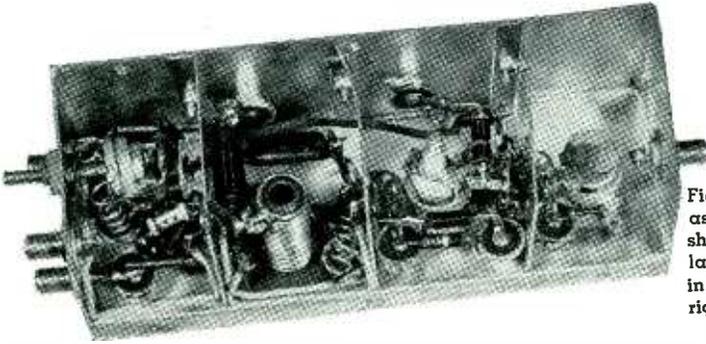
Underside of assembled chassis showing component layout. Tuners are in two r-f stages at right and local oscillator at left.
